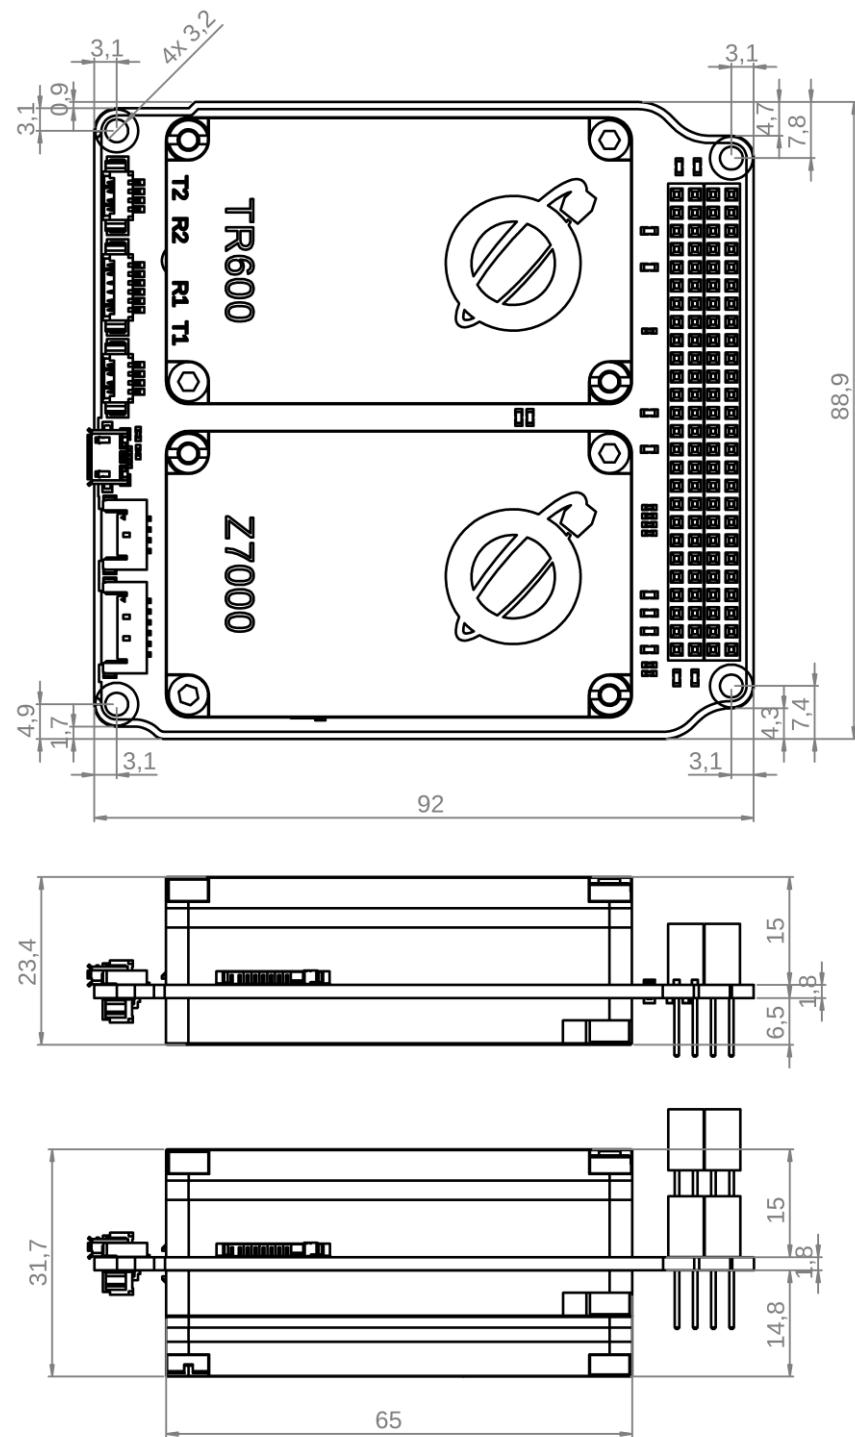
Mechanical drawing of the NanoDock SDR with mounted daughterboards
